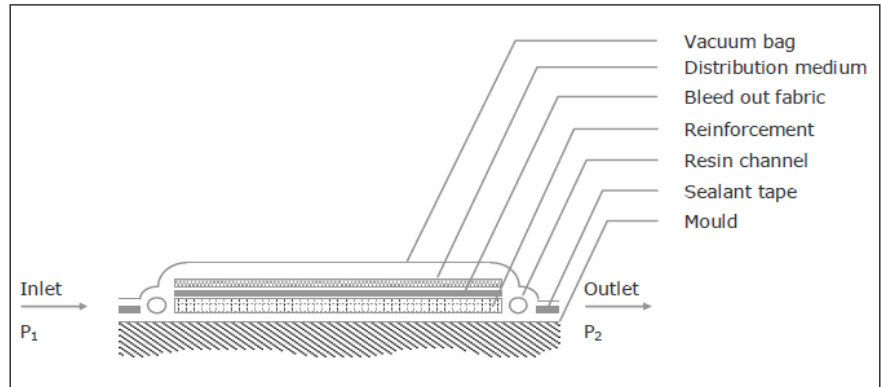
Vacuum infusion mould lay-up, p_1 =inlet pressure, p_2 =outlet pressure [6]
